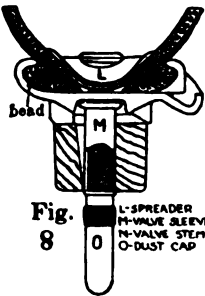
A clincher hard, non-stretchable bead tire on a quick detachable, demountable rim.
